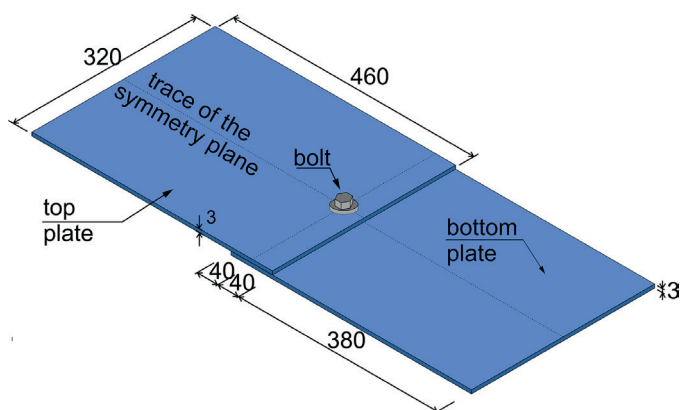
Geometry of analyzed bolted lap joint (dimensions in mm)
